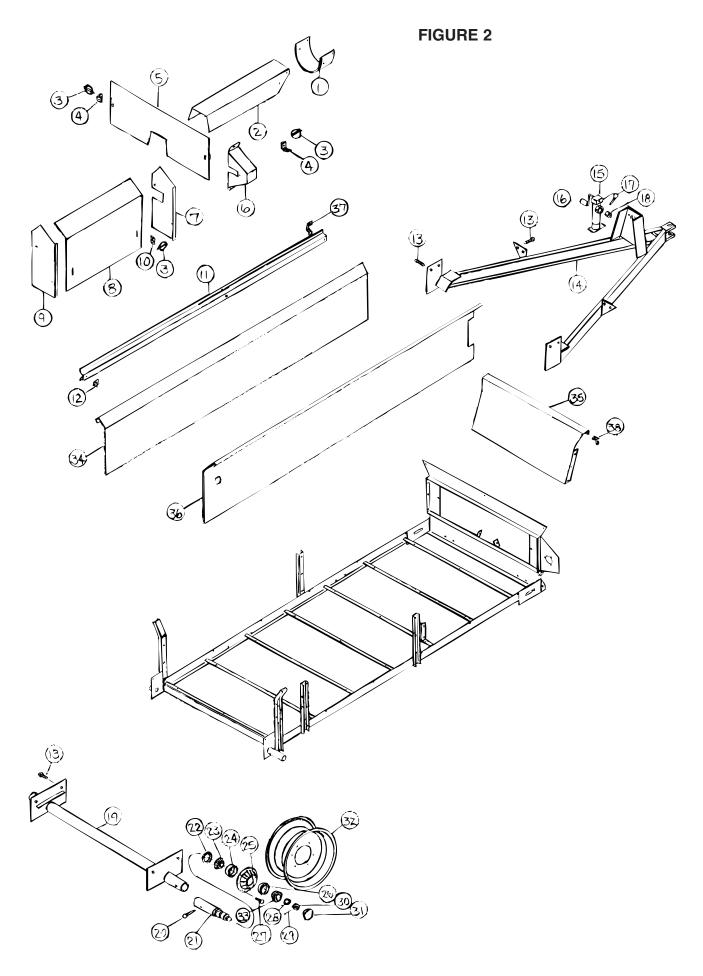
MODEL 125 SHIELDS, AXLE AND POLE ASSEMBLY
